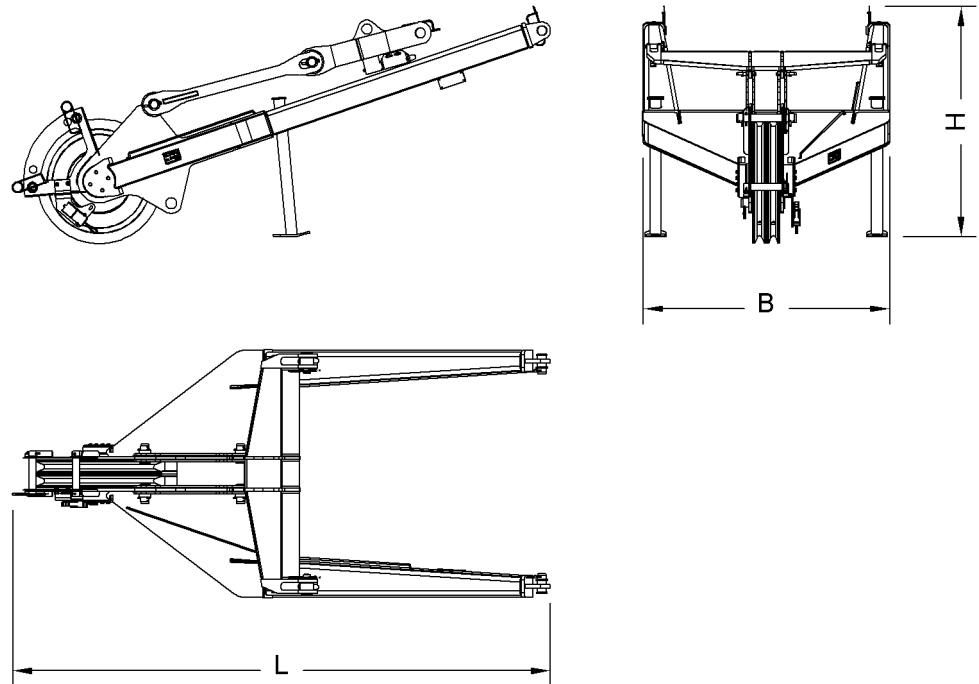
Dimensions of auxiliary jib (79300 lb) for the boom head section
